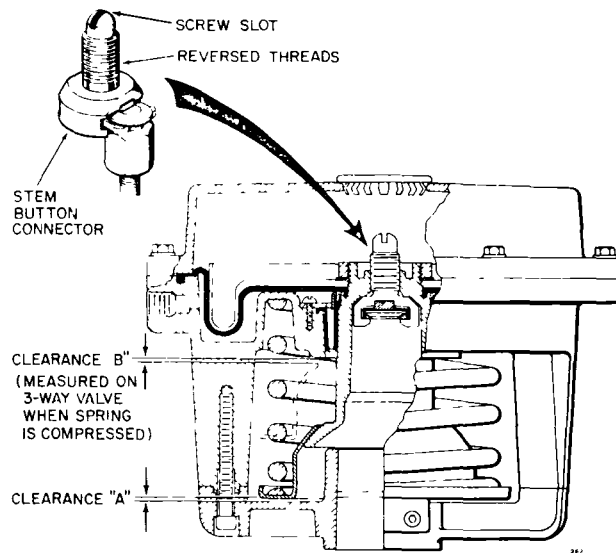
Details of MP953B or MP953D Operator Connected to Valve Stem
